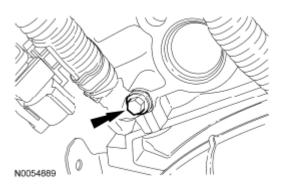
Locating LH Heated Oxygen Sensor Electrical Connector Courtesy of FORD MOTOR CO.
